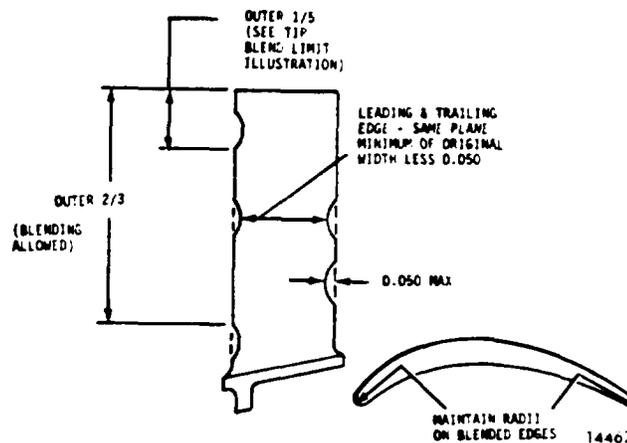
Compressor Rotor Blade Leading and Trailing Edge Blend Limits
